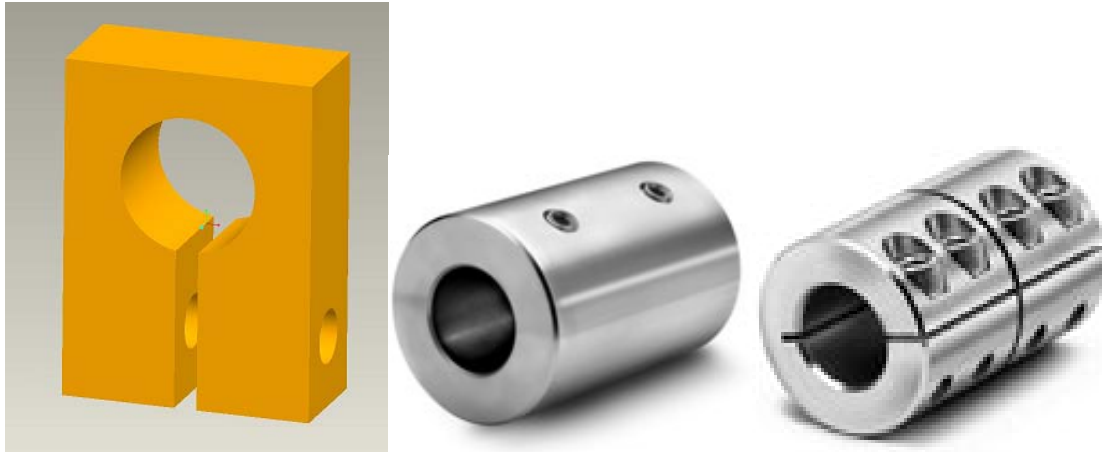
a) Felix Huang's method of clamping b) Rigid set-screw couple c) Rigid clamping couple
